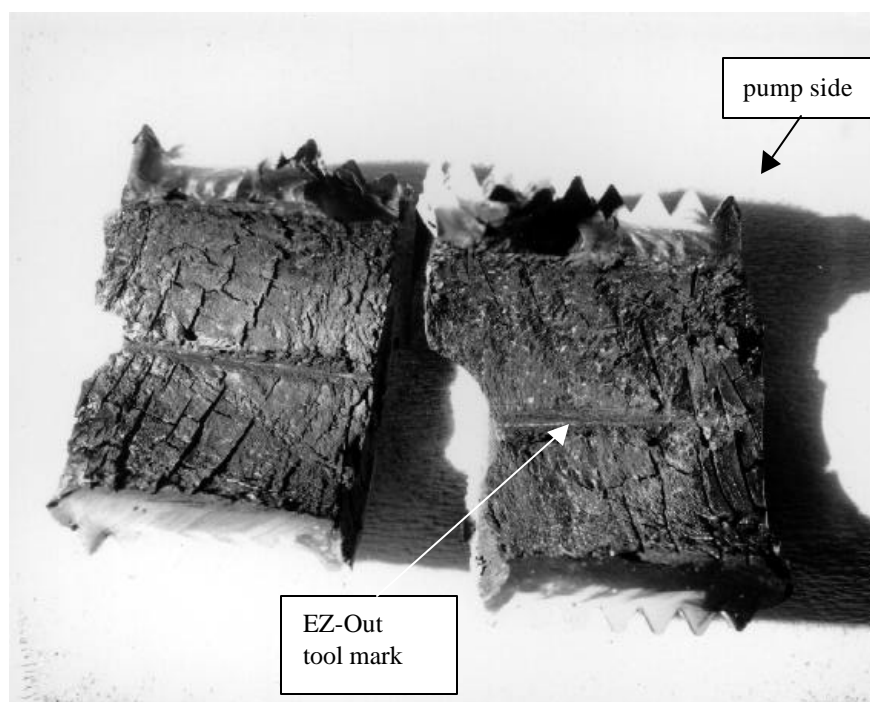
Interior view of fitting threads (Neg# 54970, ~5.5X)
